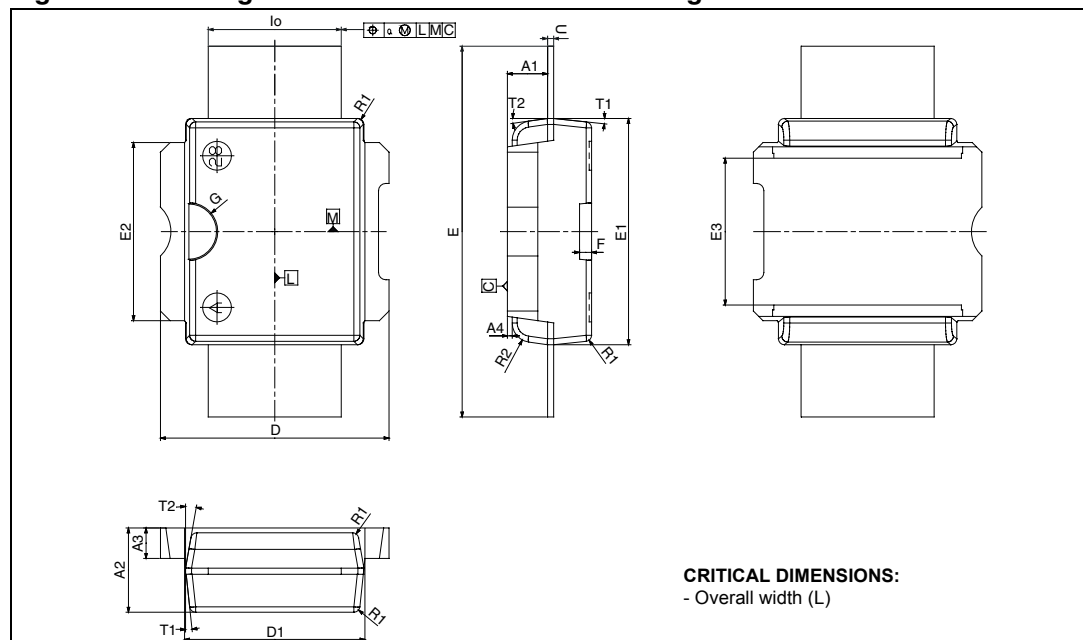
Package dimensions PowerSO-10RF formed lead
